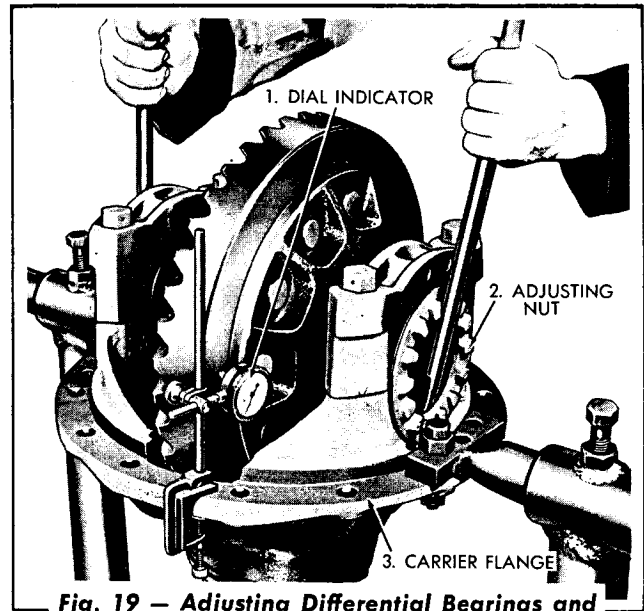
Adjusting Differential Bearings and Checking Run-Out of Ring Gear
